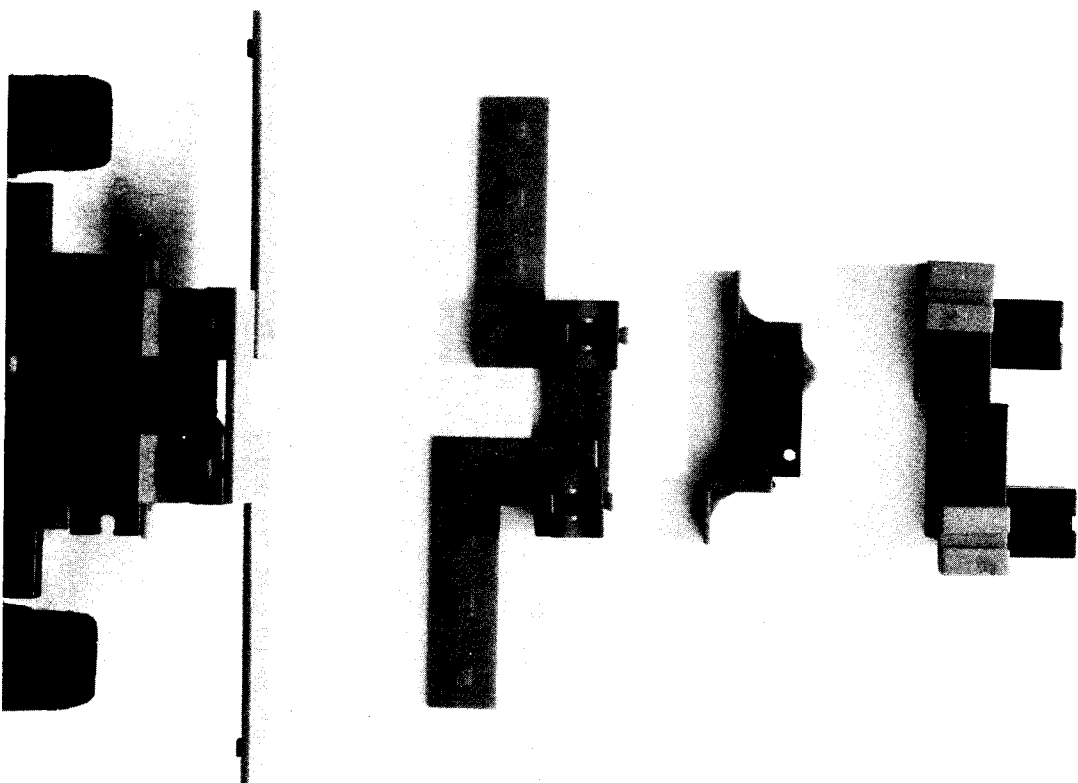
Step-by-step instructions for building the TutеBot chassis. (a) Front-end assembly. (b) switch assembly (c) bumper assembly (d) connection of bumper assembly to front-end assembly.
